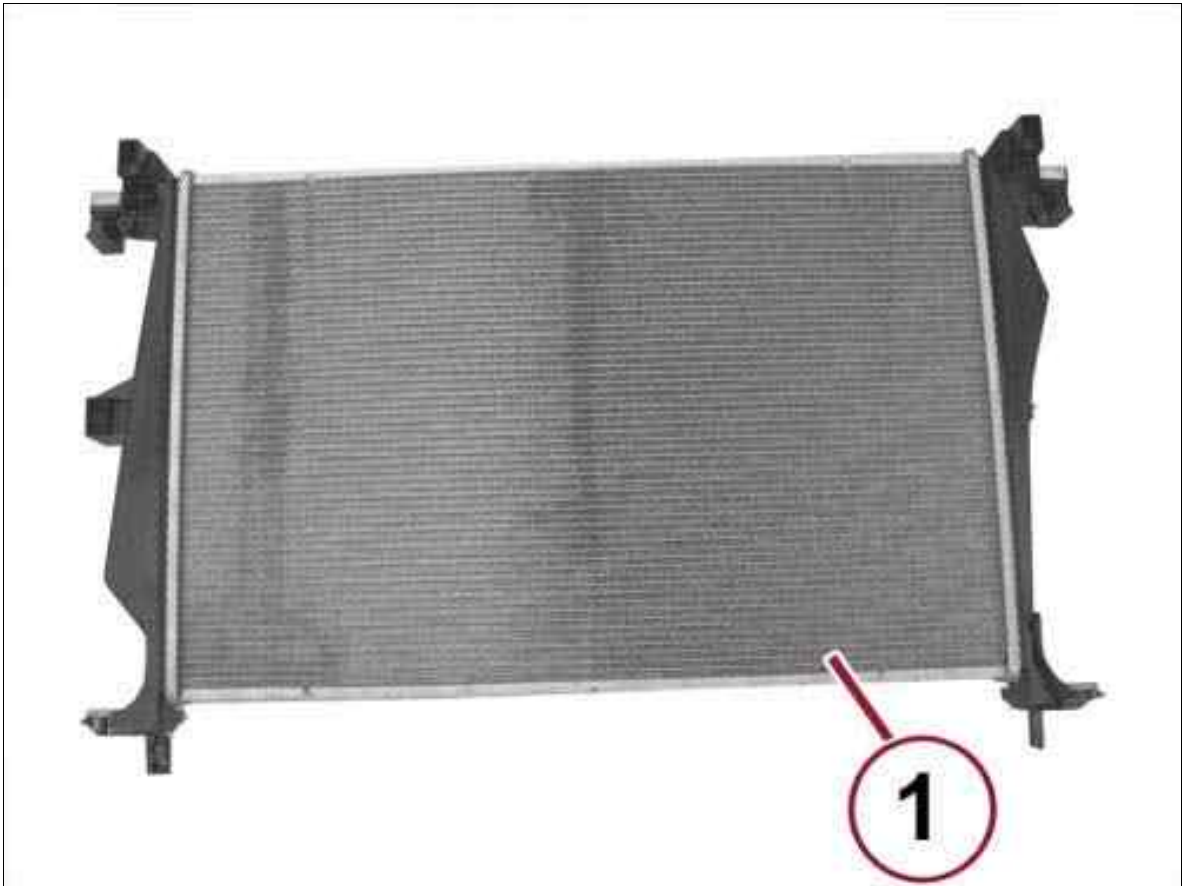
A/C Condenser/Transmission Oil Cooler & Pins
